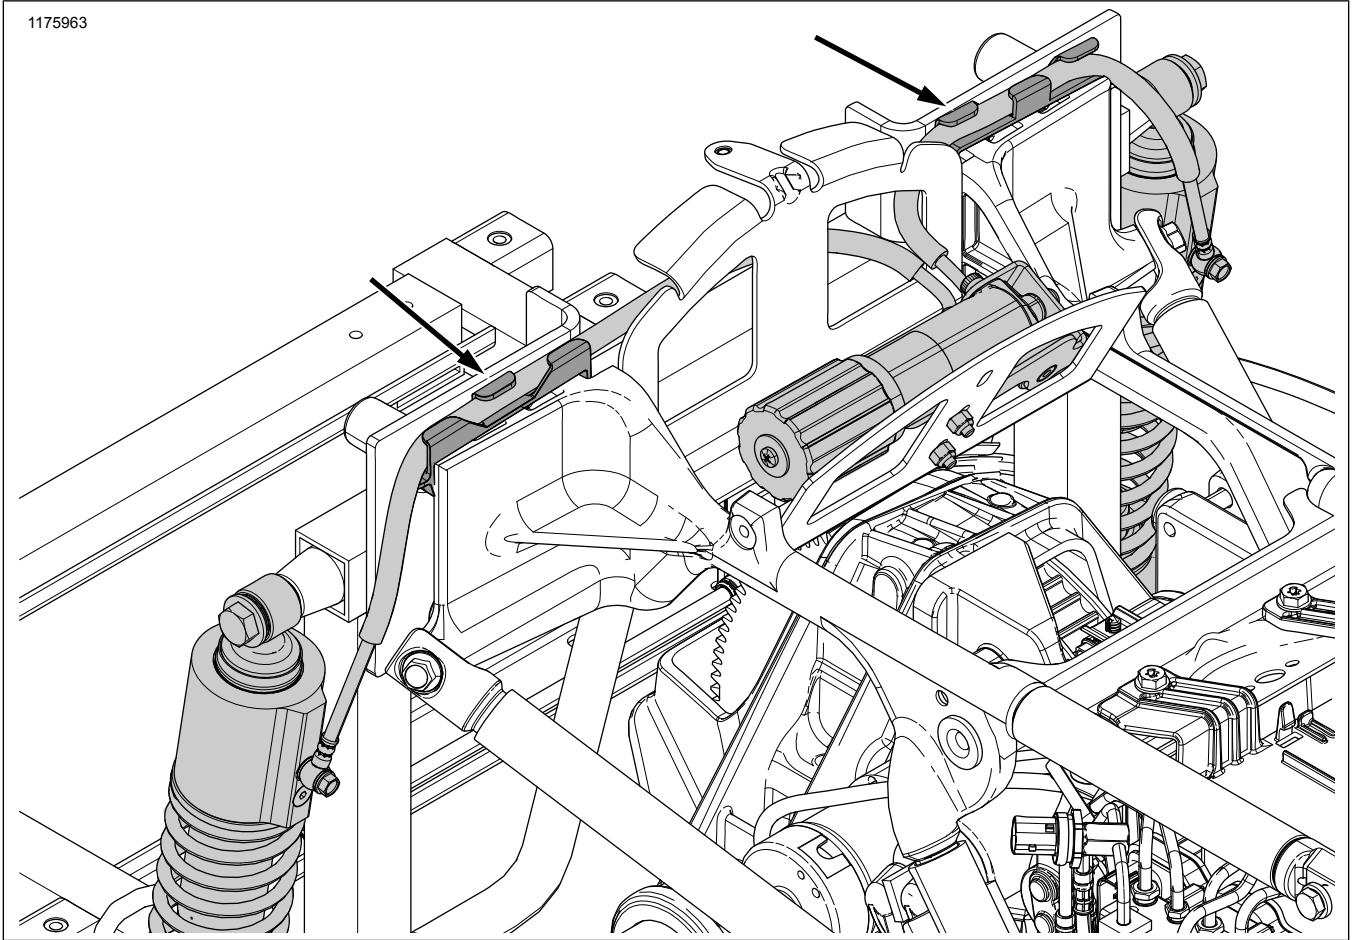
Shock Hose Routing and Retainer Location (parts removed for visibility)
